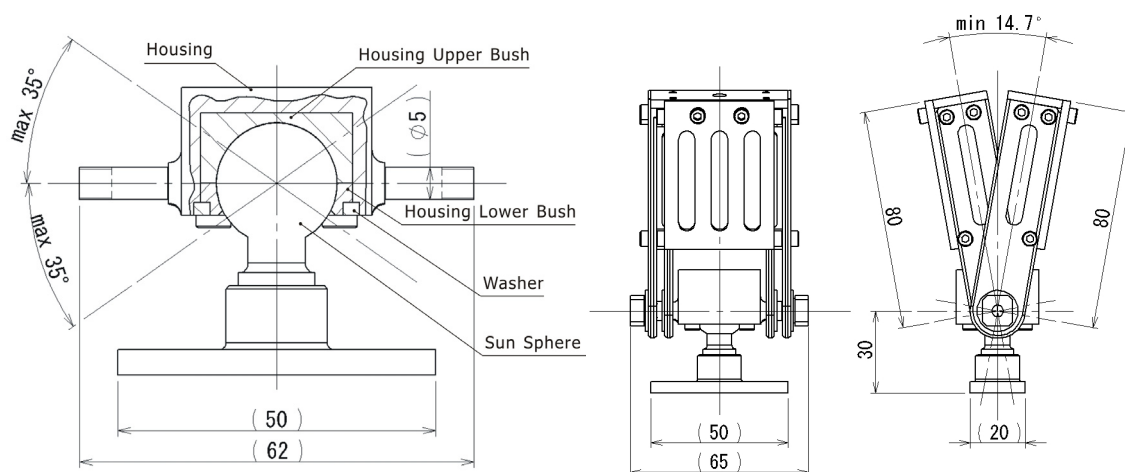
Assembly drawings of lower passive joint developed for WL-16RII.
